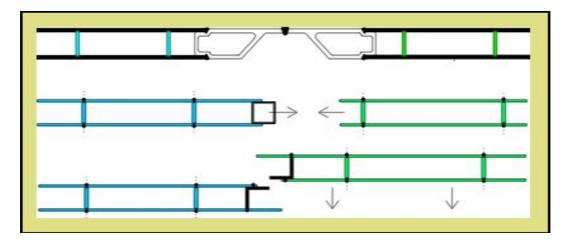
typical joints between all-metal sandwich panels.
